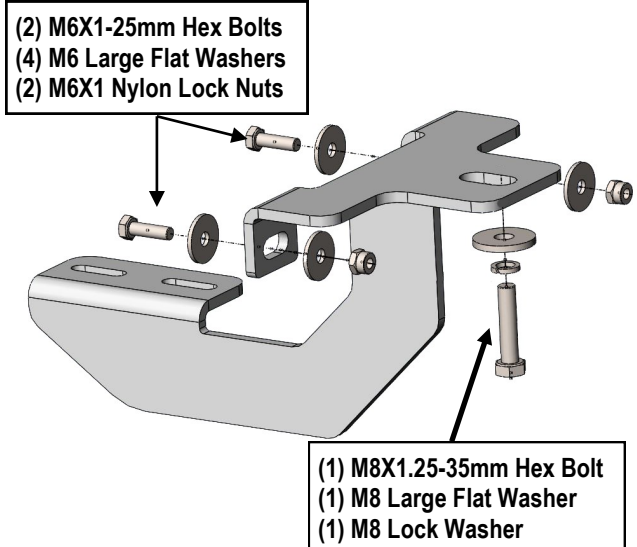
Driver Side (3) Mounting Locations On The Vehicle
